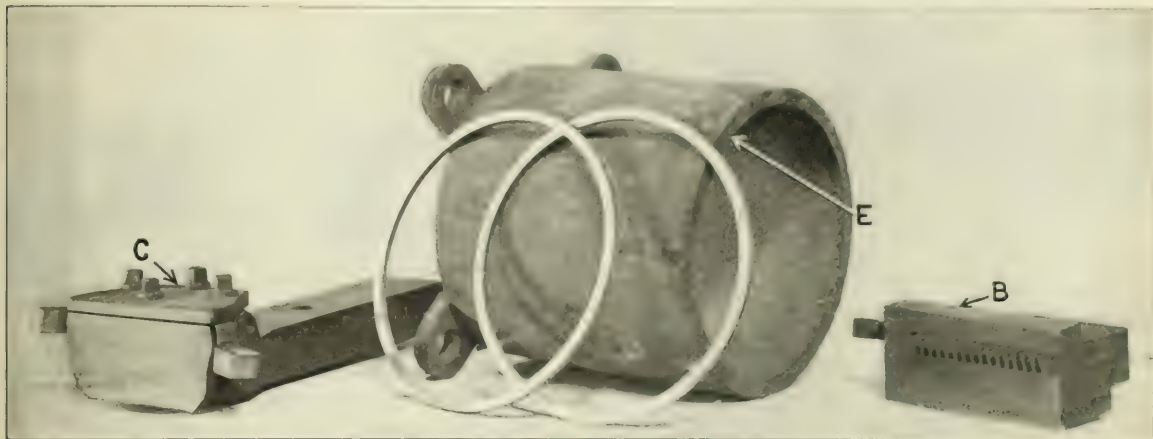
Tools for Boring and Cutting Off Packing Rings for Air Pump.
